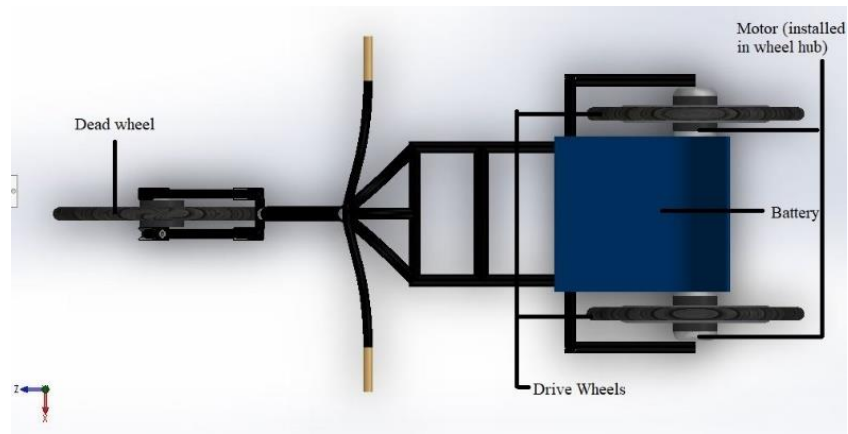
the arrangement of tricycle layout, i.e. rear wheel drive.
